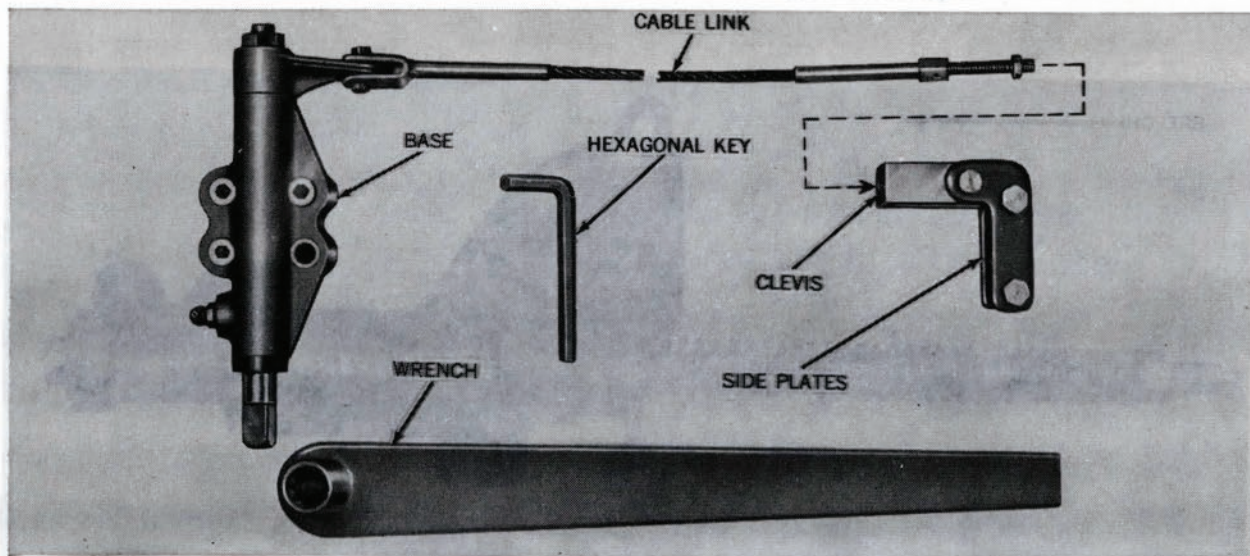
Stop Bolt Hand Retraction Unit and Wrenches.
